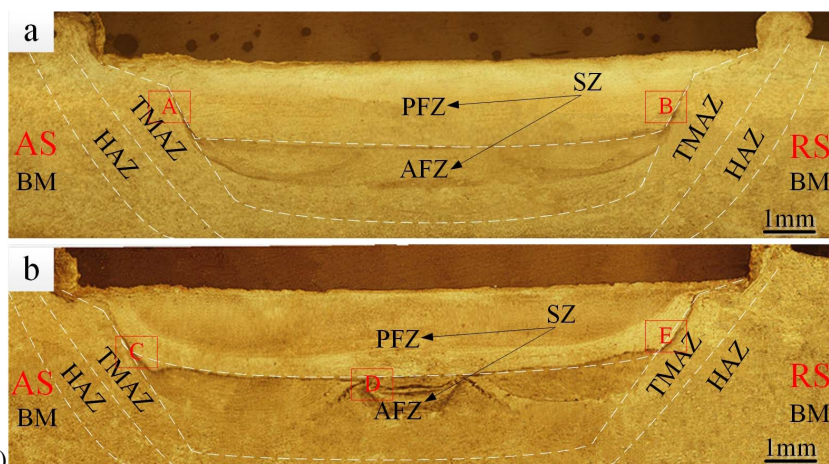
Macrostructures of the repaired joints using two welding processes: (a) ultrasonic assisted A-PFFSR and (b) conventional A-PFFSR
